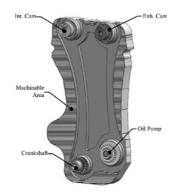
Geometry of the base model with a machinable area (The surface marked with a striped pattern).
